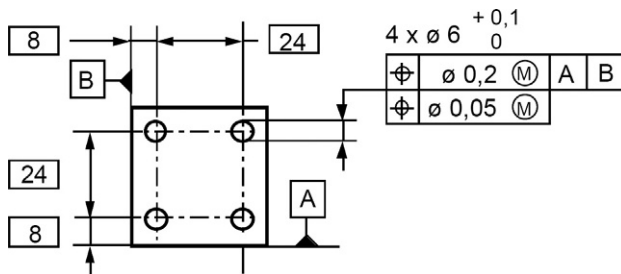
Example of drawing indication, position tolerances with and without datum
